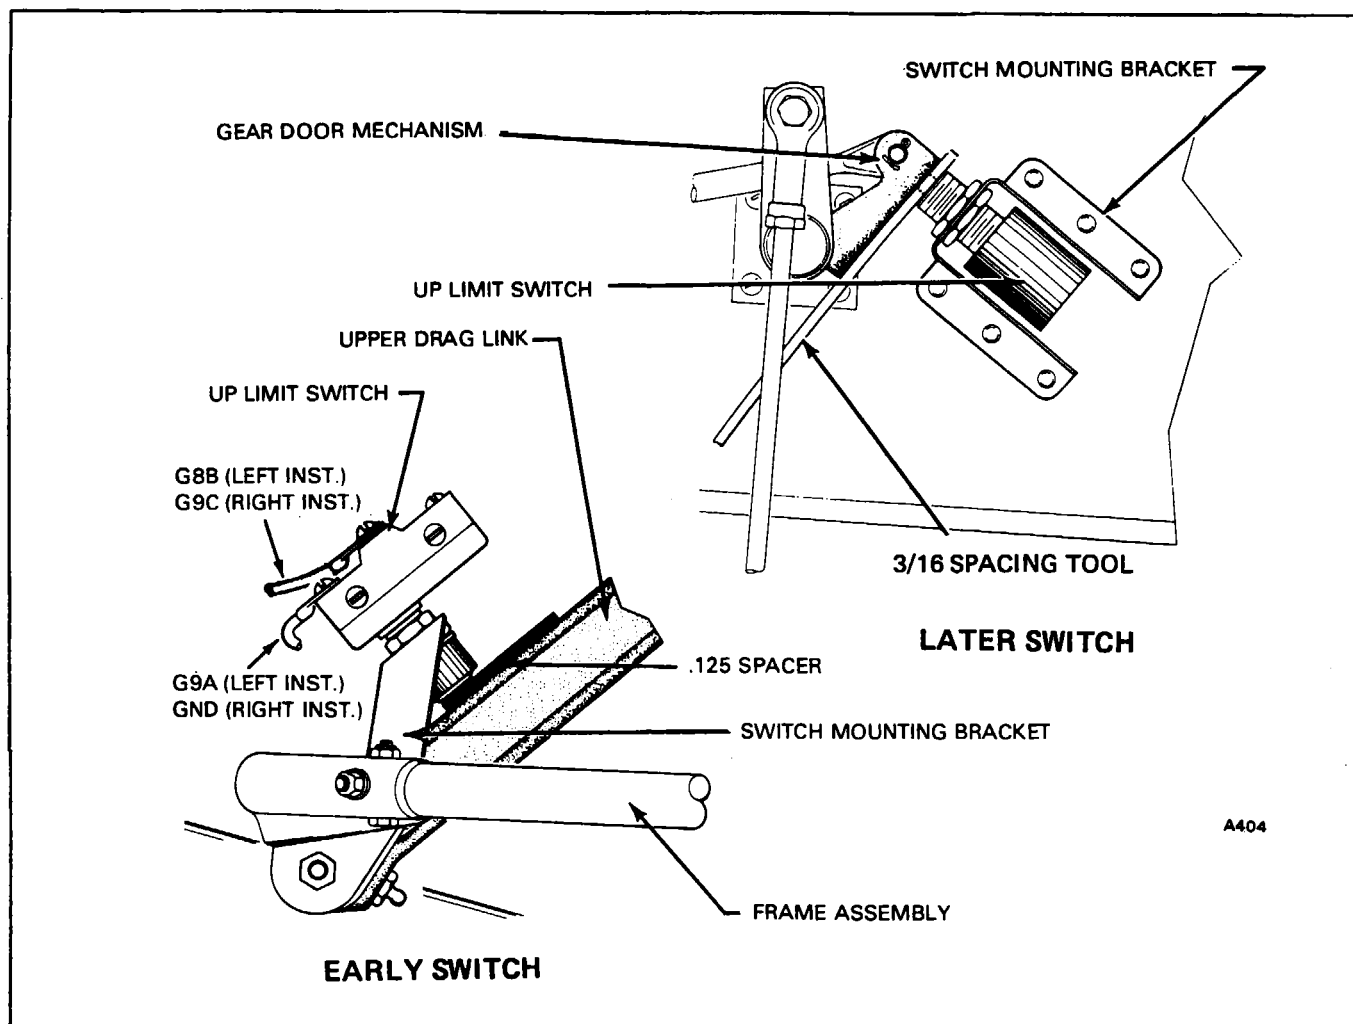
Adjustment of Main Gear Up Limit Switch
